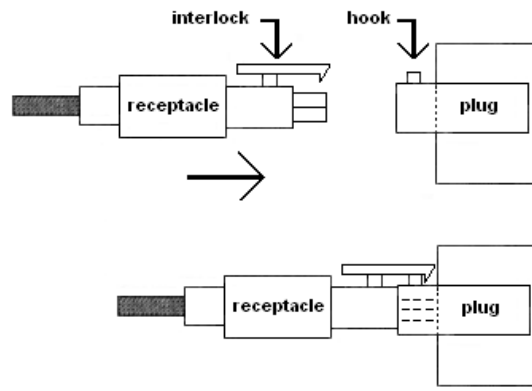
Side view of receptacle-plug insertion into voltage conditioner assembly
